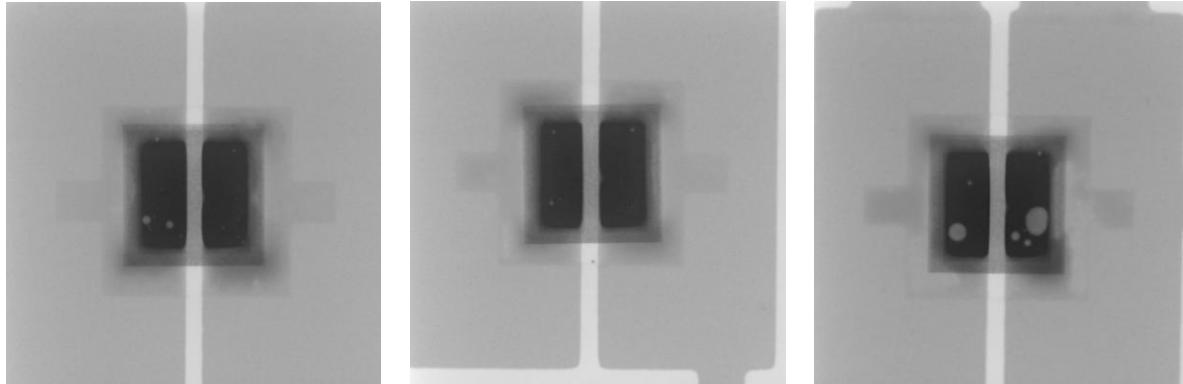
Transmission X-ray images of packages solder attached to PCBs with the solder bump process (left and center), vs. without solder bumps formed beforehand (right). The solder bump scheme enabled almost zero pore formation during solder reflow, which should result in higher shear strength.
